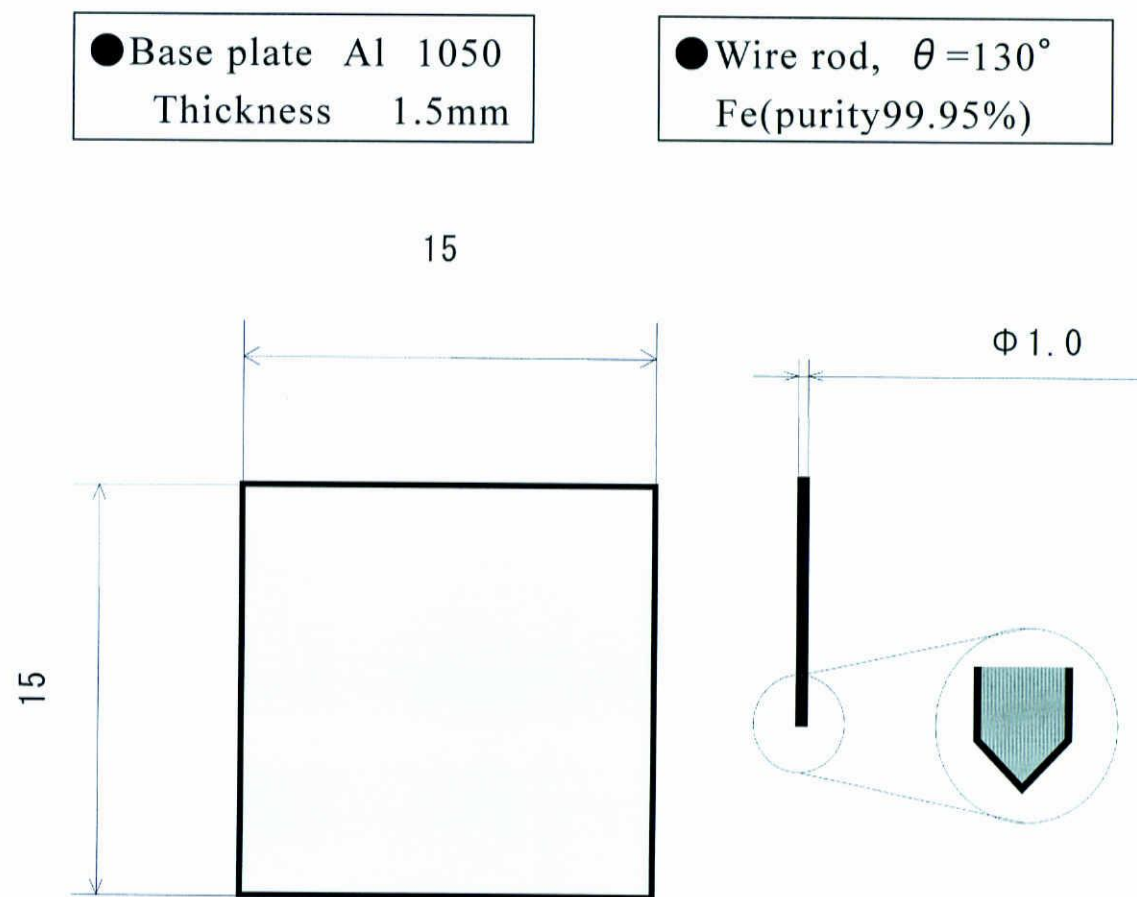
Base metal plate of shape and wire rod of shape.
